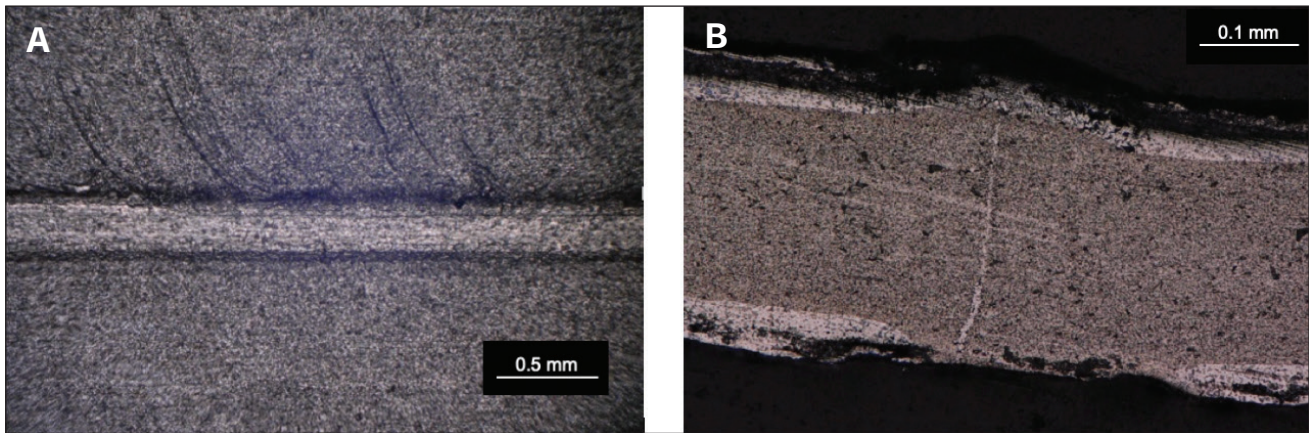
Specimens of a good weld. A – Top view; B – cross-sectional view of the joint's cross section.
